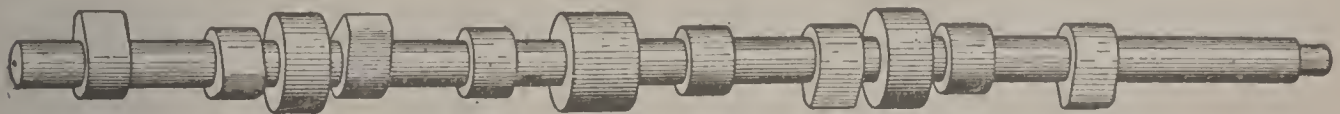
Cams Integral with Shaft—Milling Machine Job
